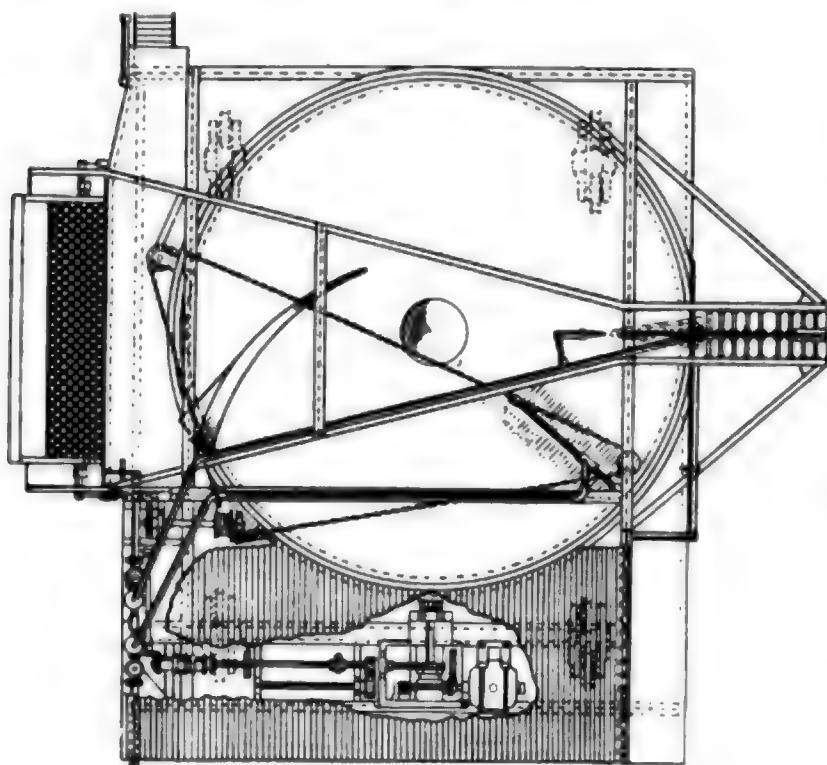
PLAN OF GOODALL MACHINE SHOWN IN FIG. 32.
